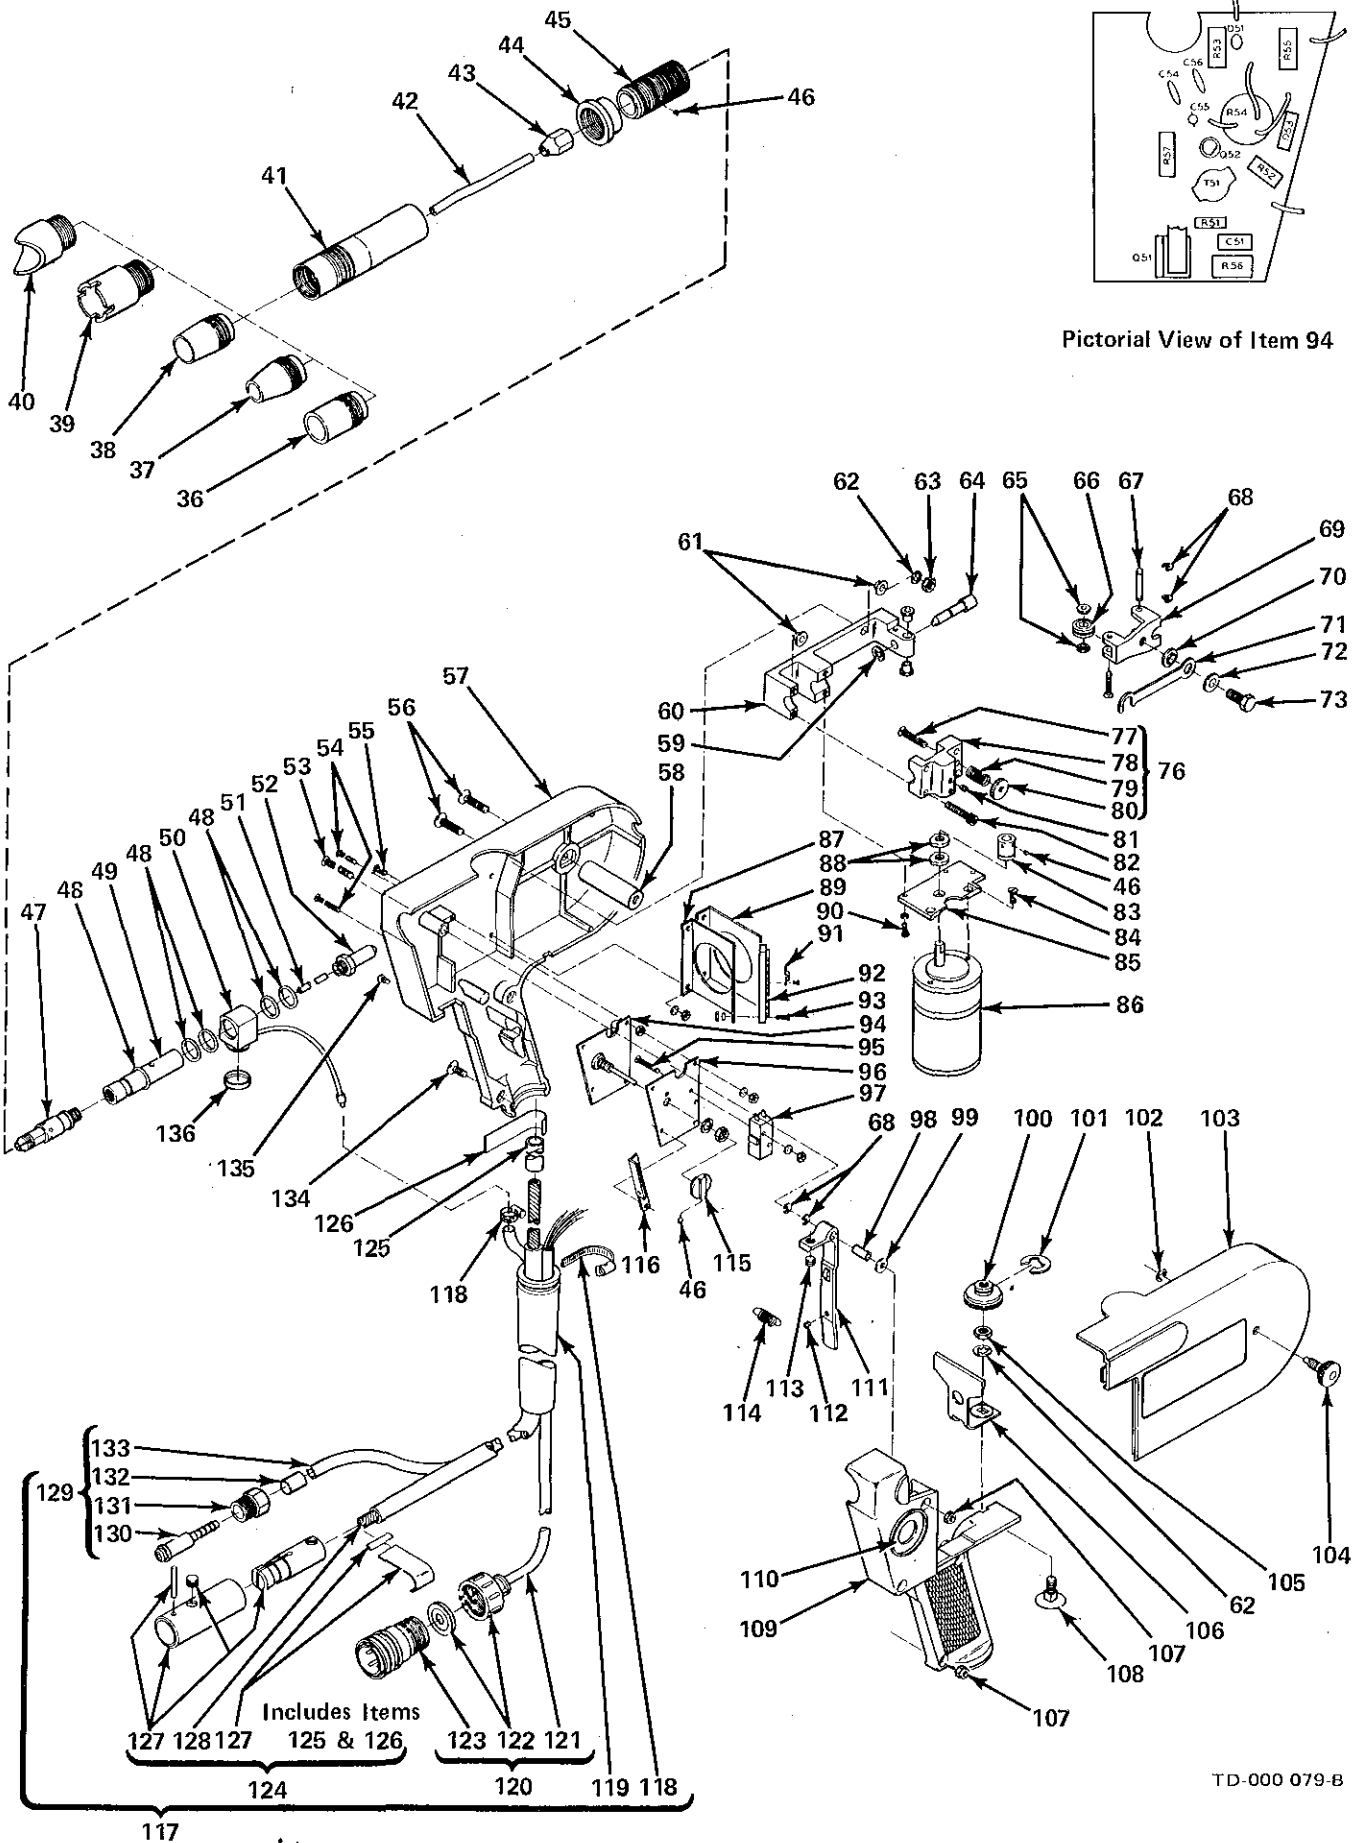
Figure B – Exploded View Of Gun (Listing Of Parts Begins On Page 4)
